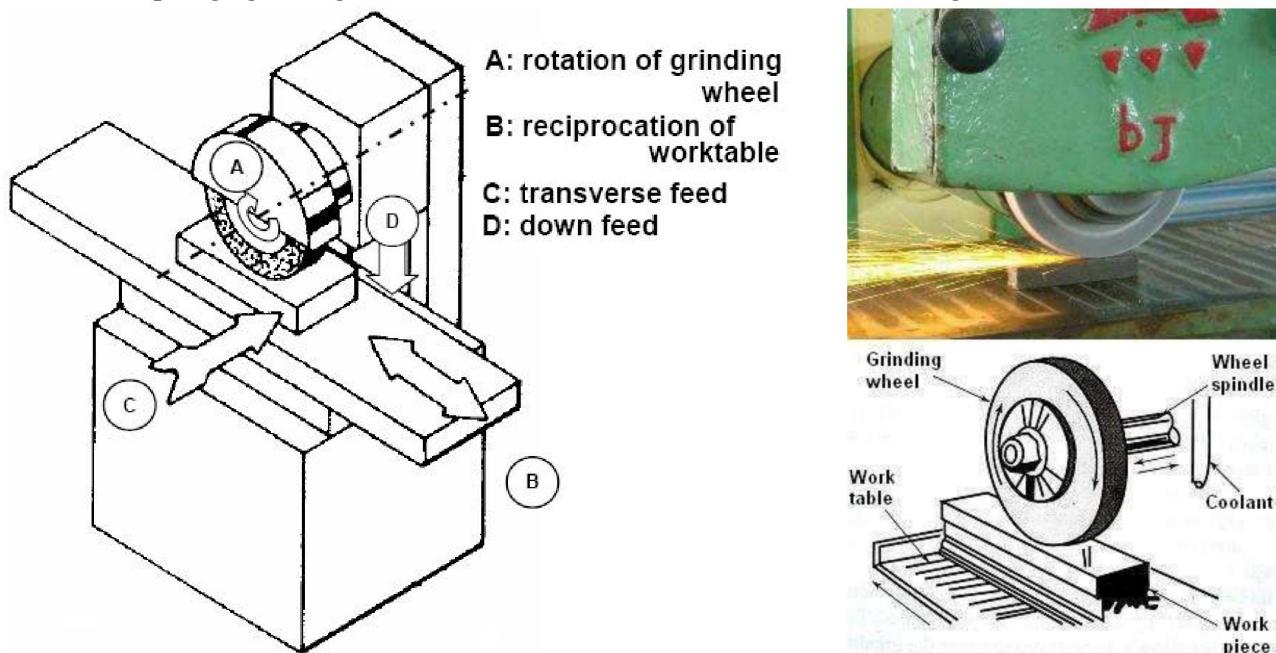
Horizontal spindle and reciprocating reciprocatingtable grinding machine
